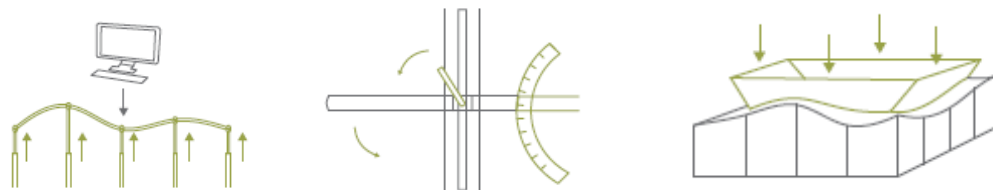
Positioning of actuators, adjusting edge angles and mounting mould sides.
